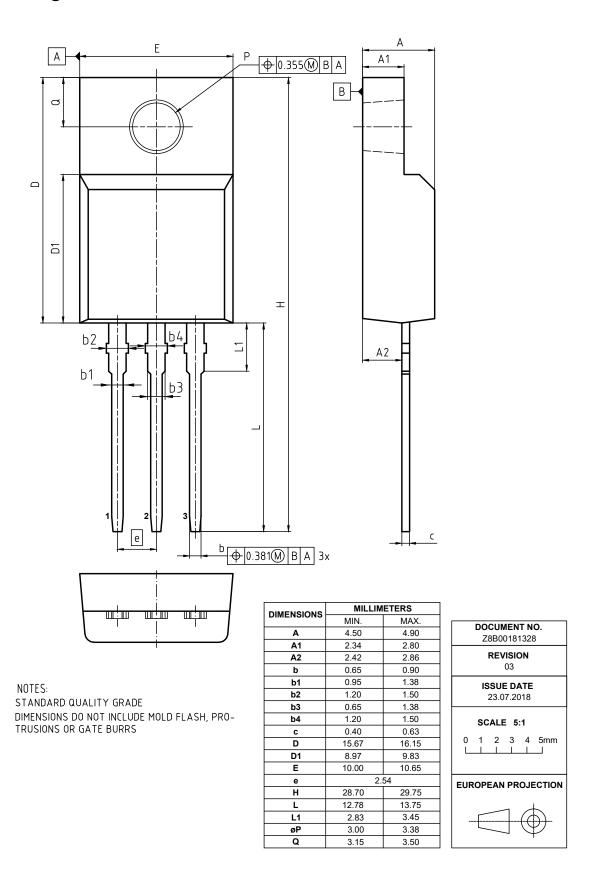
Outline PG-TO220 FullPAK, dimensions in mm/inches
